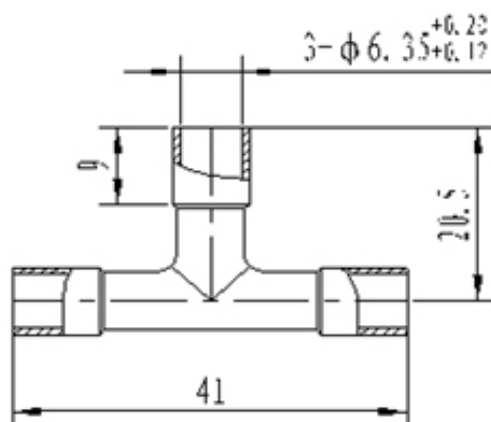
7 : Structure drawing of the oil balance T-type three -way valve
